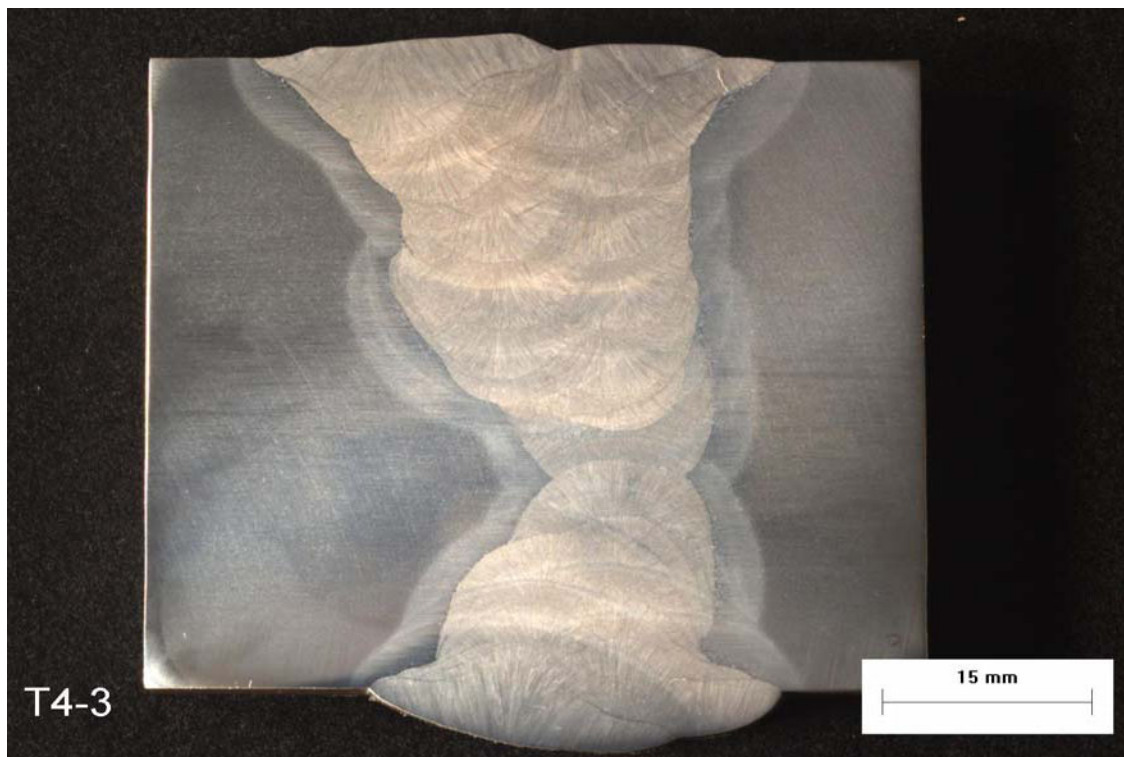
Tandem SAW Weld Cross Section of Double J-groove Test
